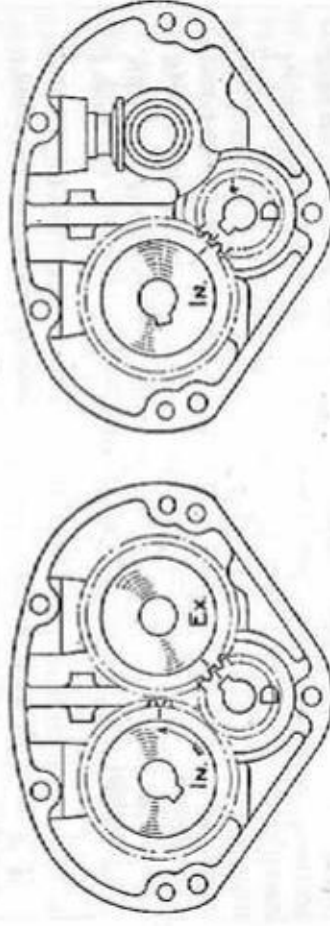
HOW TO ALIGN THE TIMING GEAR MARKS
